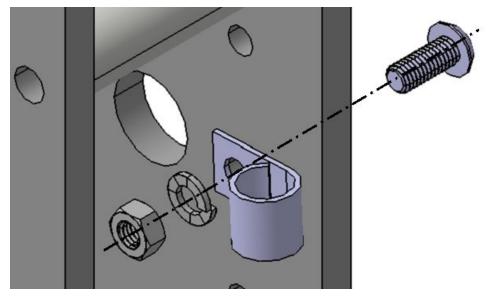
Insertion of fasteners to setup the screw-in cable holder
